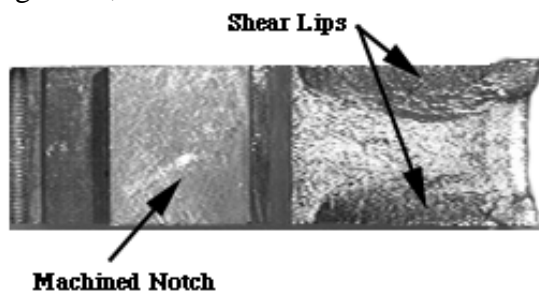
, Fracture surface of a 6061 Aluminum displaying extensive shear lips
